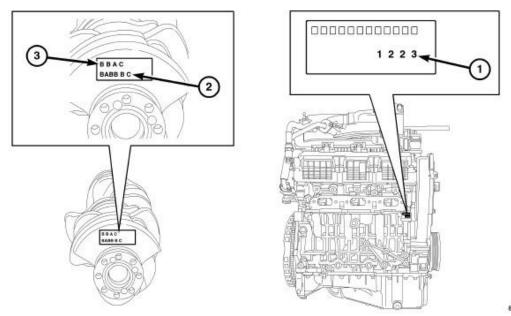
Crankshaft Engine Block Codes Courtesy of CHRYSLER LLC
